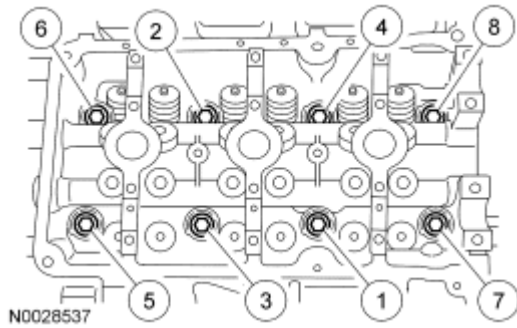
Identifying Tightening Sequence Of Cylinder Head Bolts
